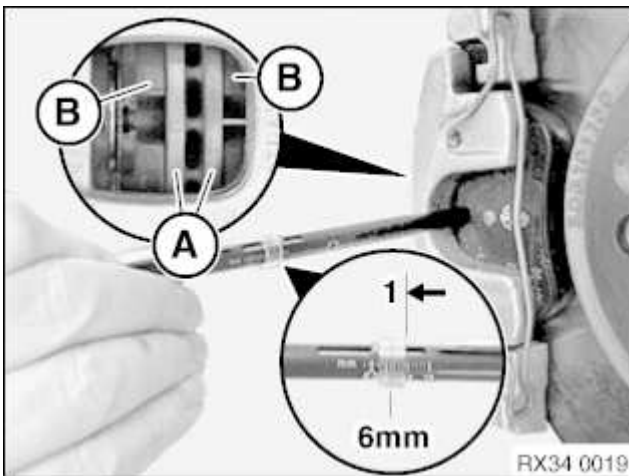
Measuring Brake Pad Thickness Using Special Tool (34 1 260)
